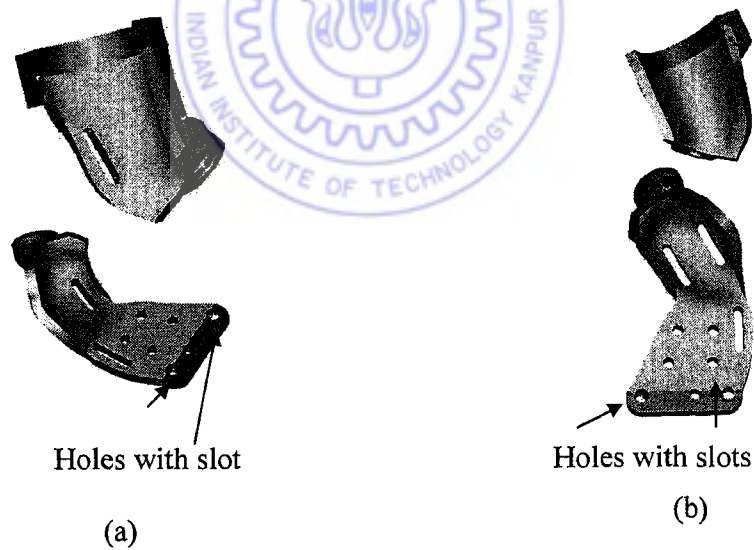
Two piece AFO having integrated arrangement for externally fixing double spherical ball & socket joint (a) AFO for right clubfoot (b) AFO for left clubfoot (See color section)
